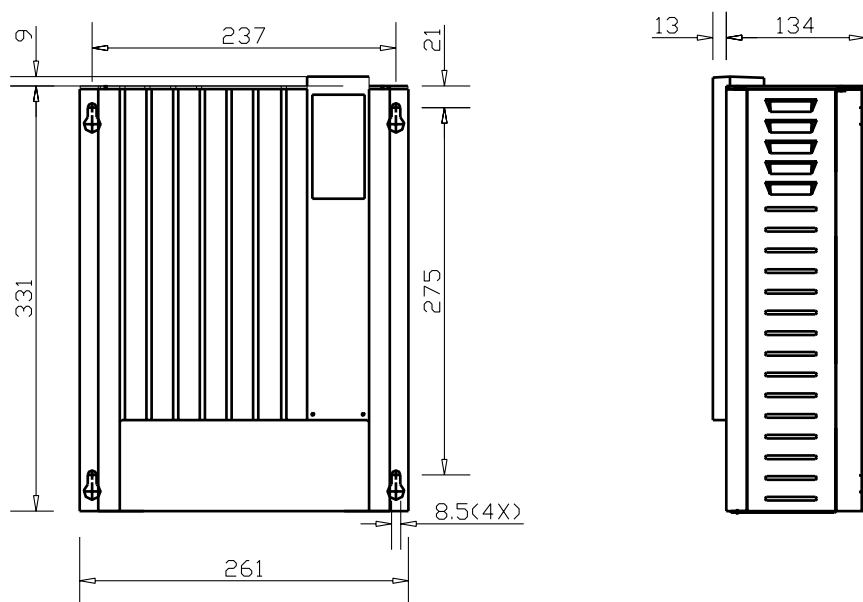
Mounting points Mass Sine 12/1200, 24/1500 230V / 50Hz and Mass Sine 12/1000, 24/1000 117V / 60Hz.
